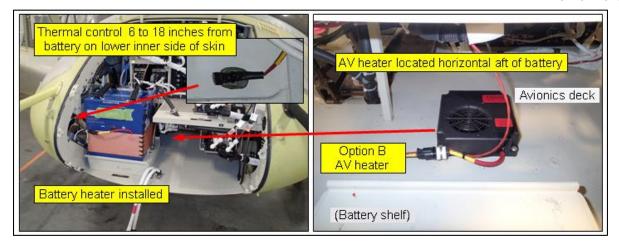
AV heater mounting options in forward avionics hold, reference heater instruction TN03094:
